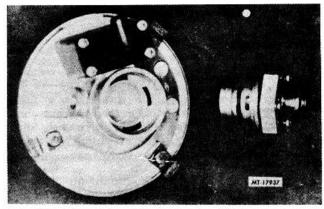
AD-2 End Cover Assembly with Purge Valve Assembly Removed
